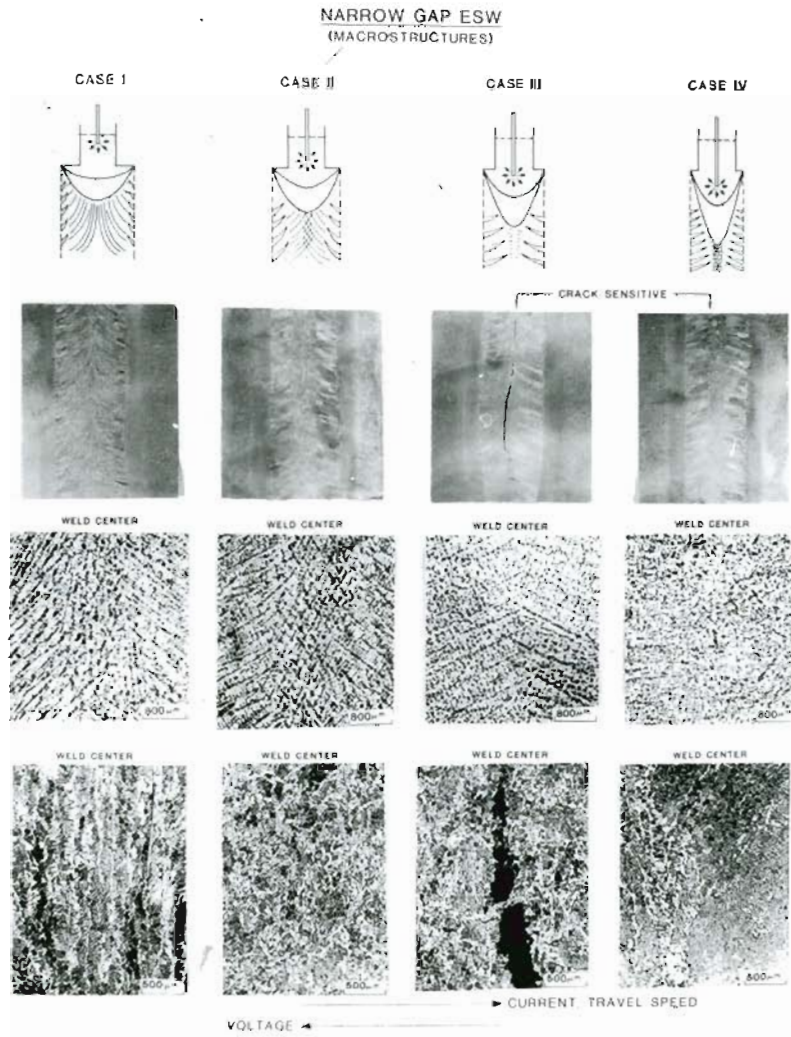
Classification of ES weld metal morphology for mild steels [6]
